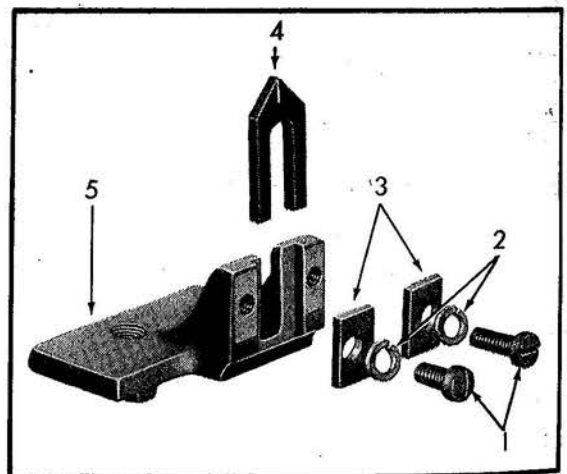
Sequence of Disassembly of Rear Luminous Sight
